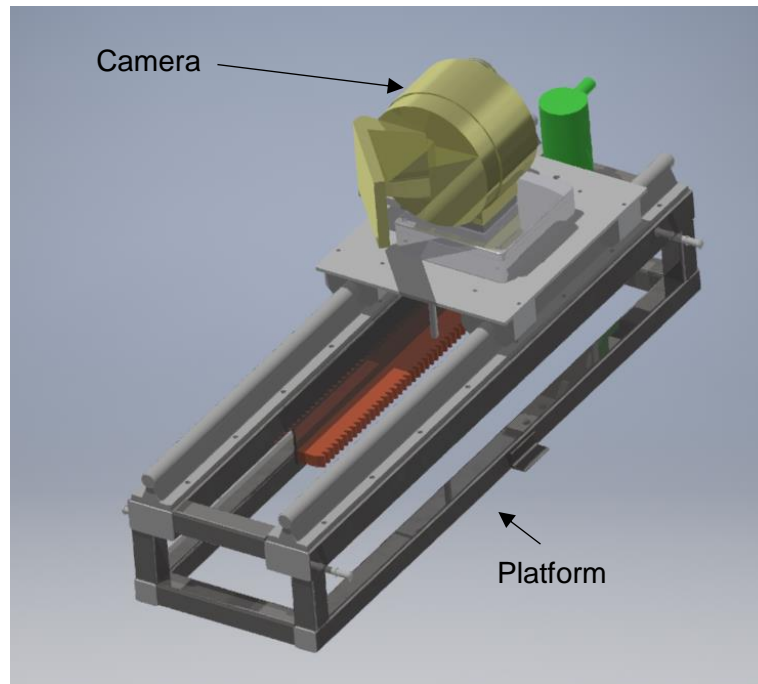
Sleeves high-resolution visual inspection equipment
